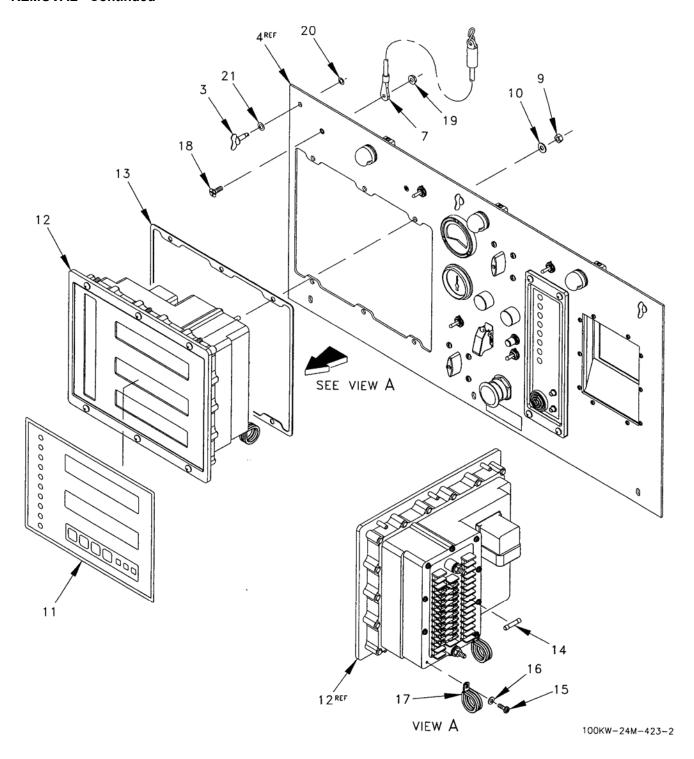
Control Box Panel Assembly (Sheet 2 of 4).
